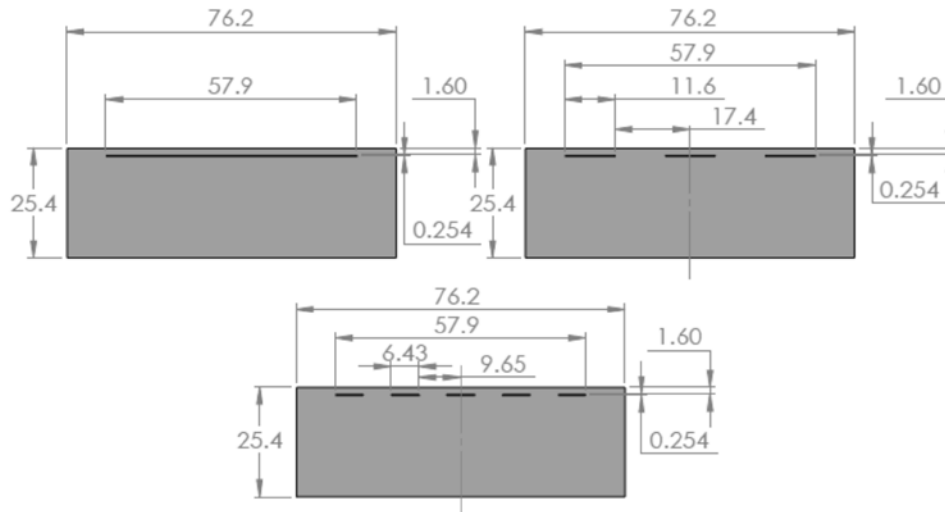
Top view of leading edge blocks showing slot configurations. Dimensions in millimeters
